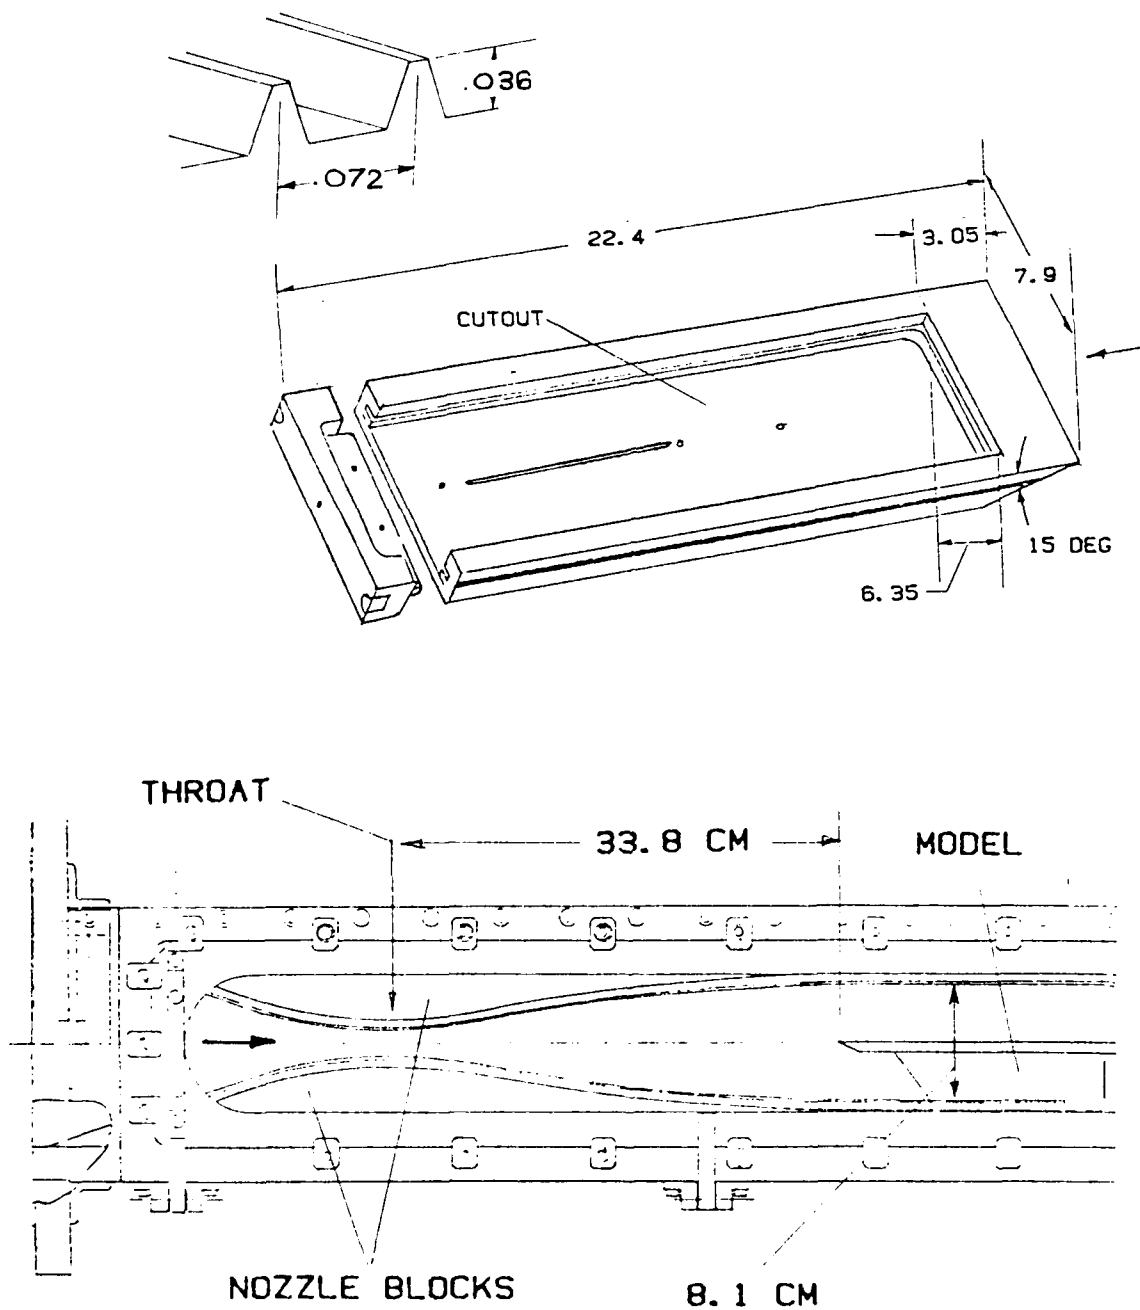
Flat plate geometry (minus surface insert). Dimensions in cm.
